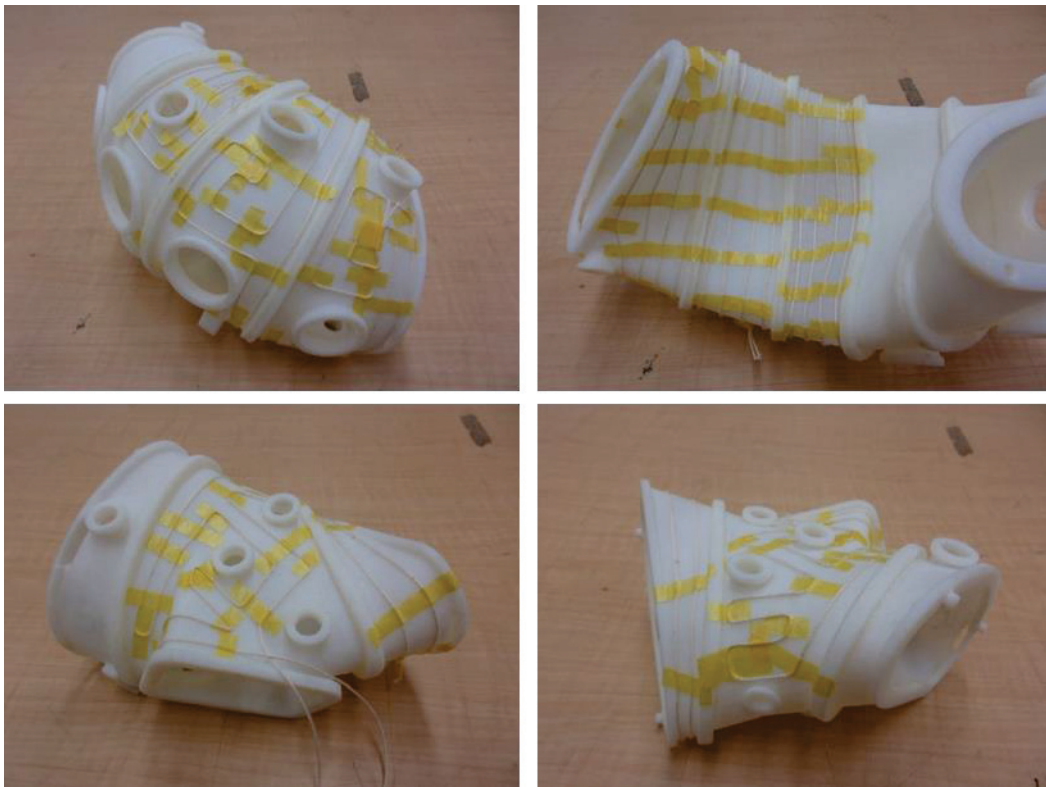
3-D printed models with wounded strings instead of the heaters.
